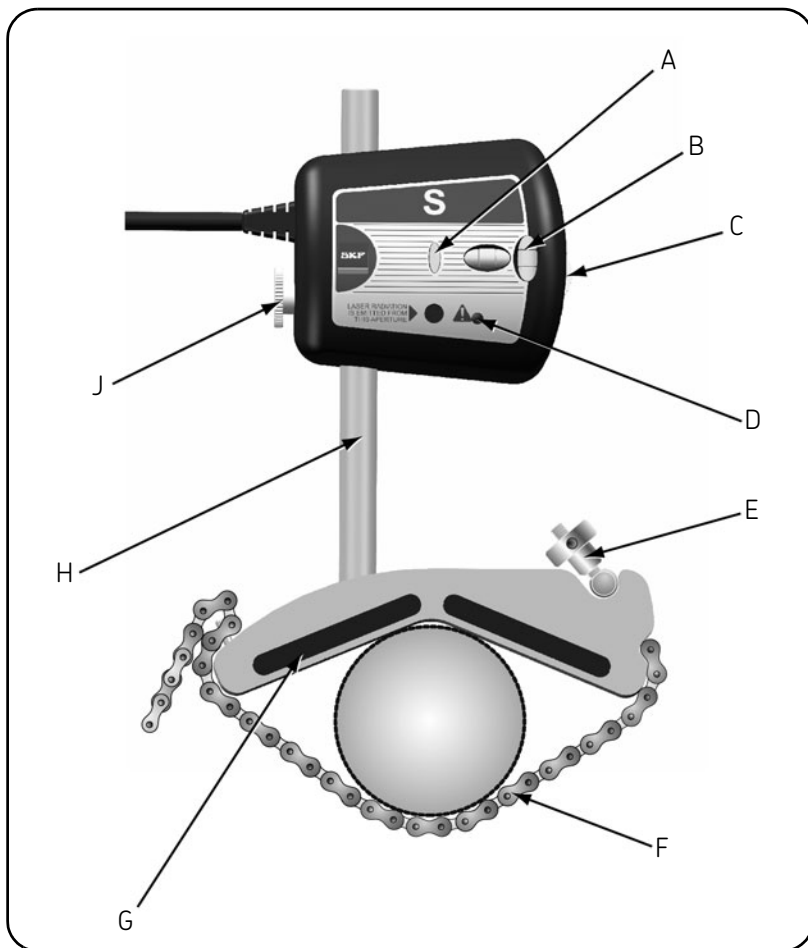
Magnetic / Mechanical fixture with measuring unit
